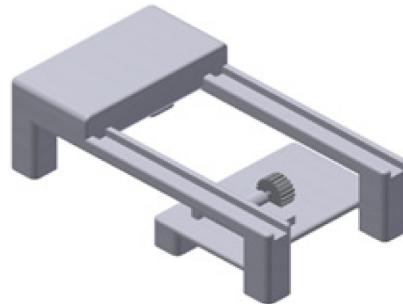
Traction device bottom plate: fixed using bed frames to keep the upper part of a person's body from moving, and rails were installed to make the upper part move smoothly.
